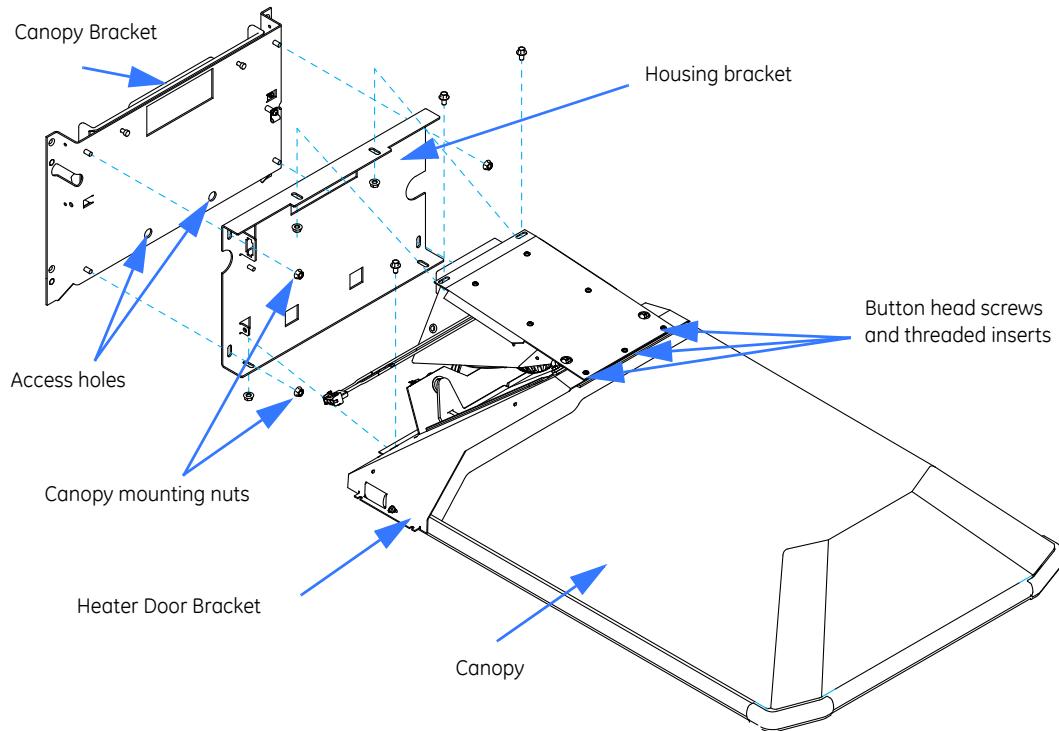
Canopy, Bracket, and Heater Housing
